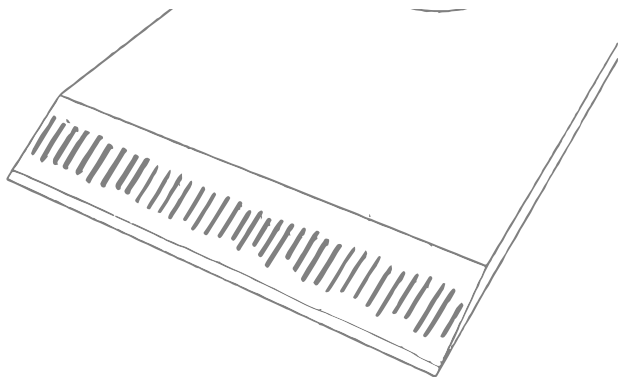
If you have set the tool rest correctly, the grinding scratches will be in the middle of the bevel.
